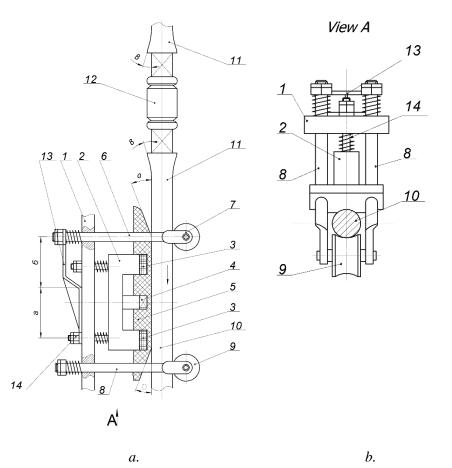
Rod magnetic flaw detector: a. - working position on the smooth part of the rod; b. - view A, bottom view.
